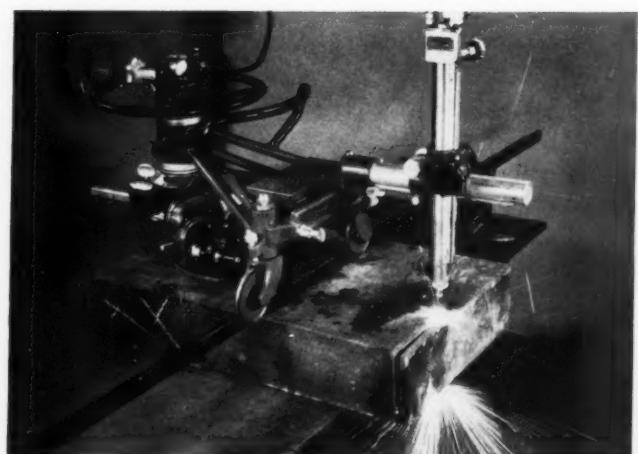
Squaring up the edge of a thick steel plate with the portable flame cutting machine guided by a rail
